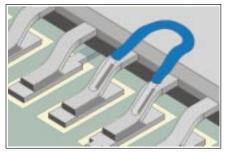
Acceptable* Wire looped and soldered to adjacent component leads.
